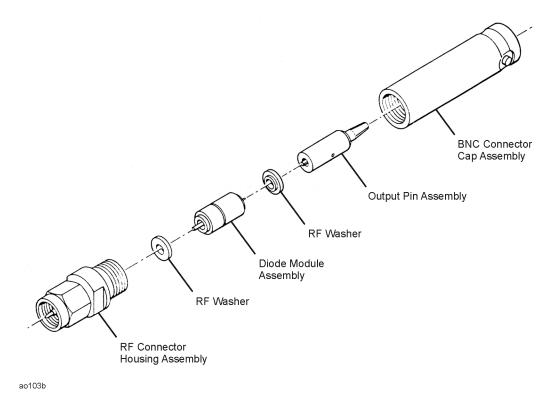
Model 8473B or 8473C Crystal Detector Assembly
